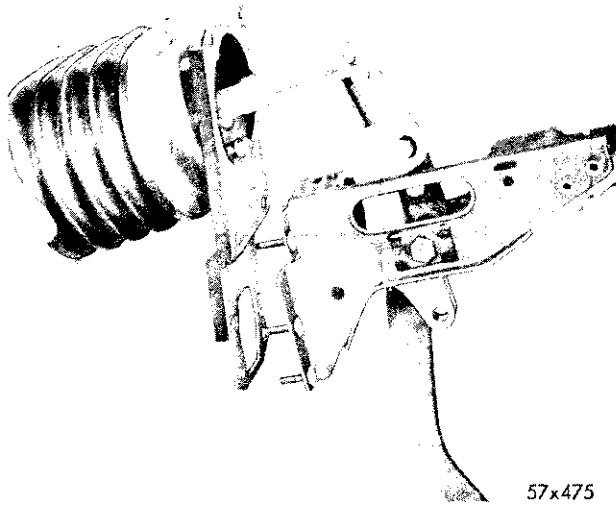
Removing or Installing the Power Brake Unit (Bellows Type)
